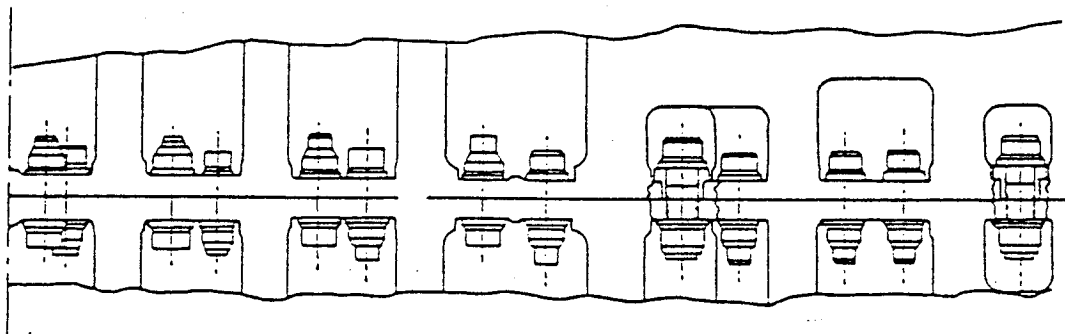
Bolted Axial Flange Used on Compressor Rig Rear Vane Case
